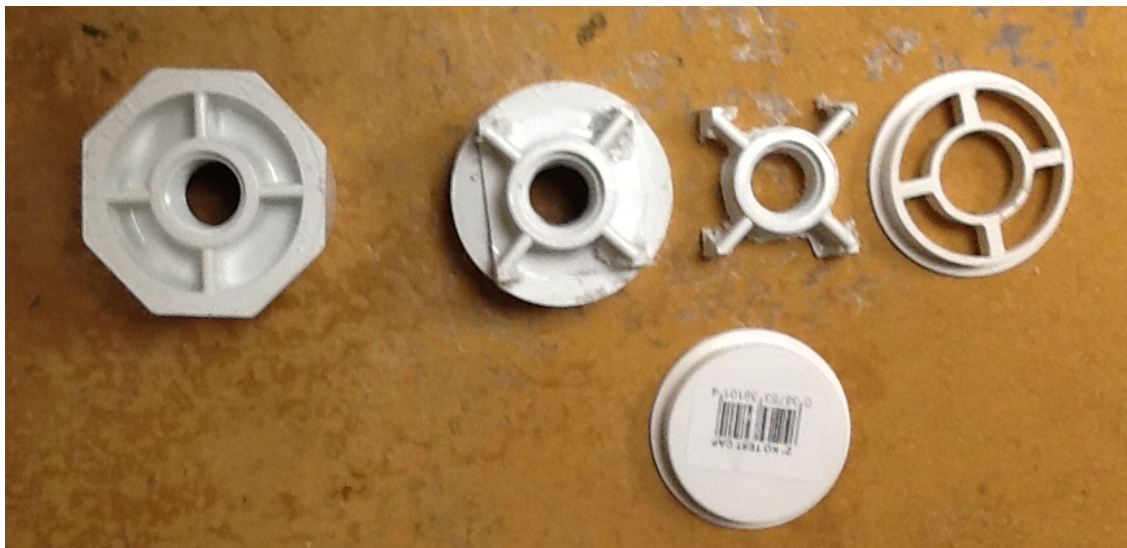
Fabrication of filter supports step 8. Finished filter support (far right) is shown alongside raw materials (far left) and partially completed parts.
